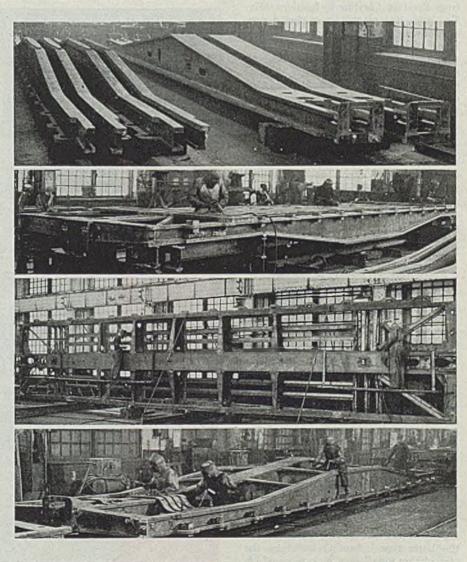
Structure is turned upside down for flat fillet and vertical welding being done here
